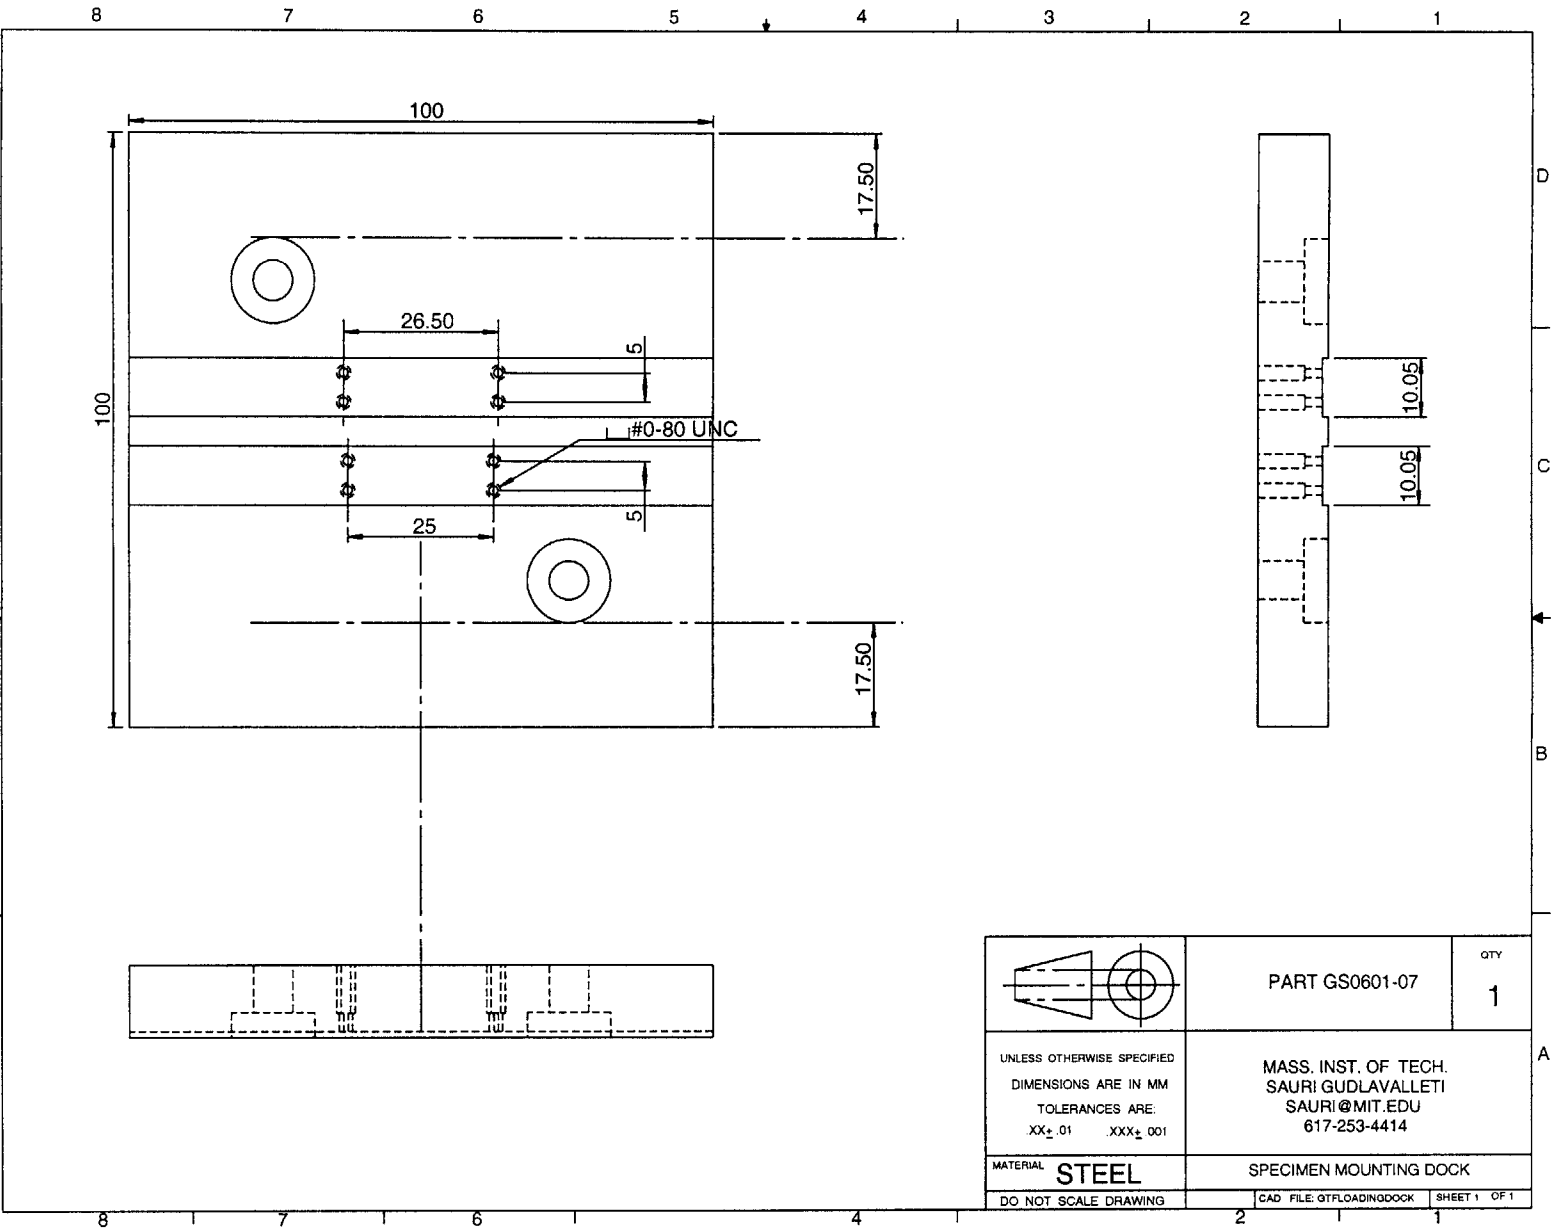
Part GS 0500-07. Thin film mounting dock, provides an ex-situ specimen mounting station.
